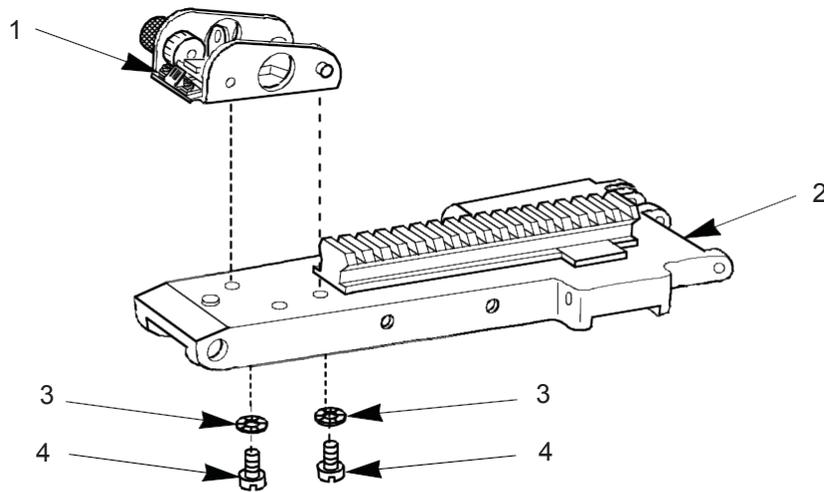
Rear Sight Assembly, Cover, Two Screws, Washers.
